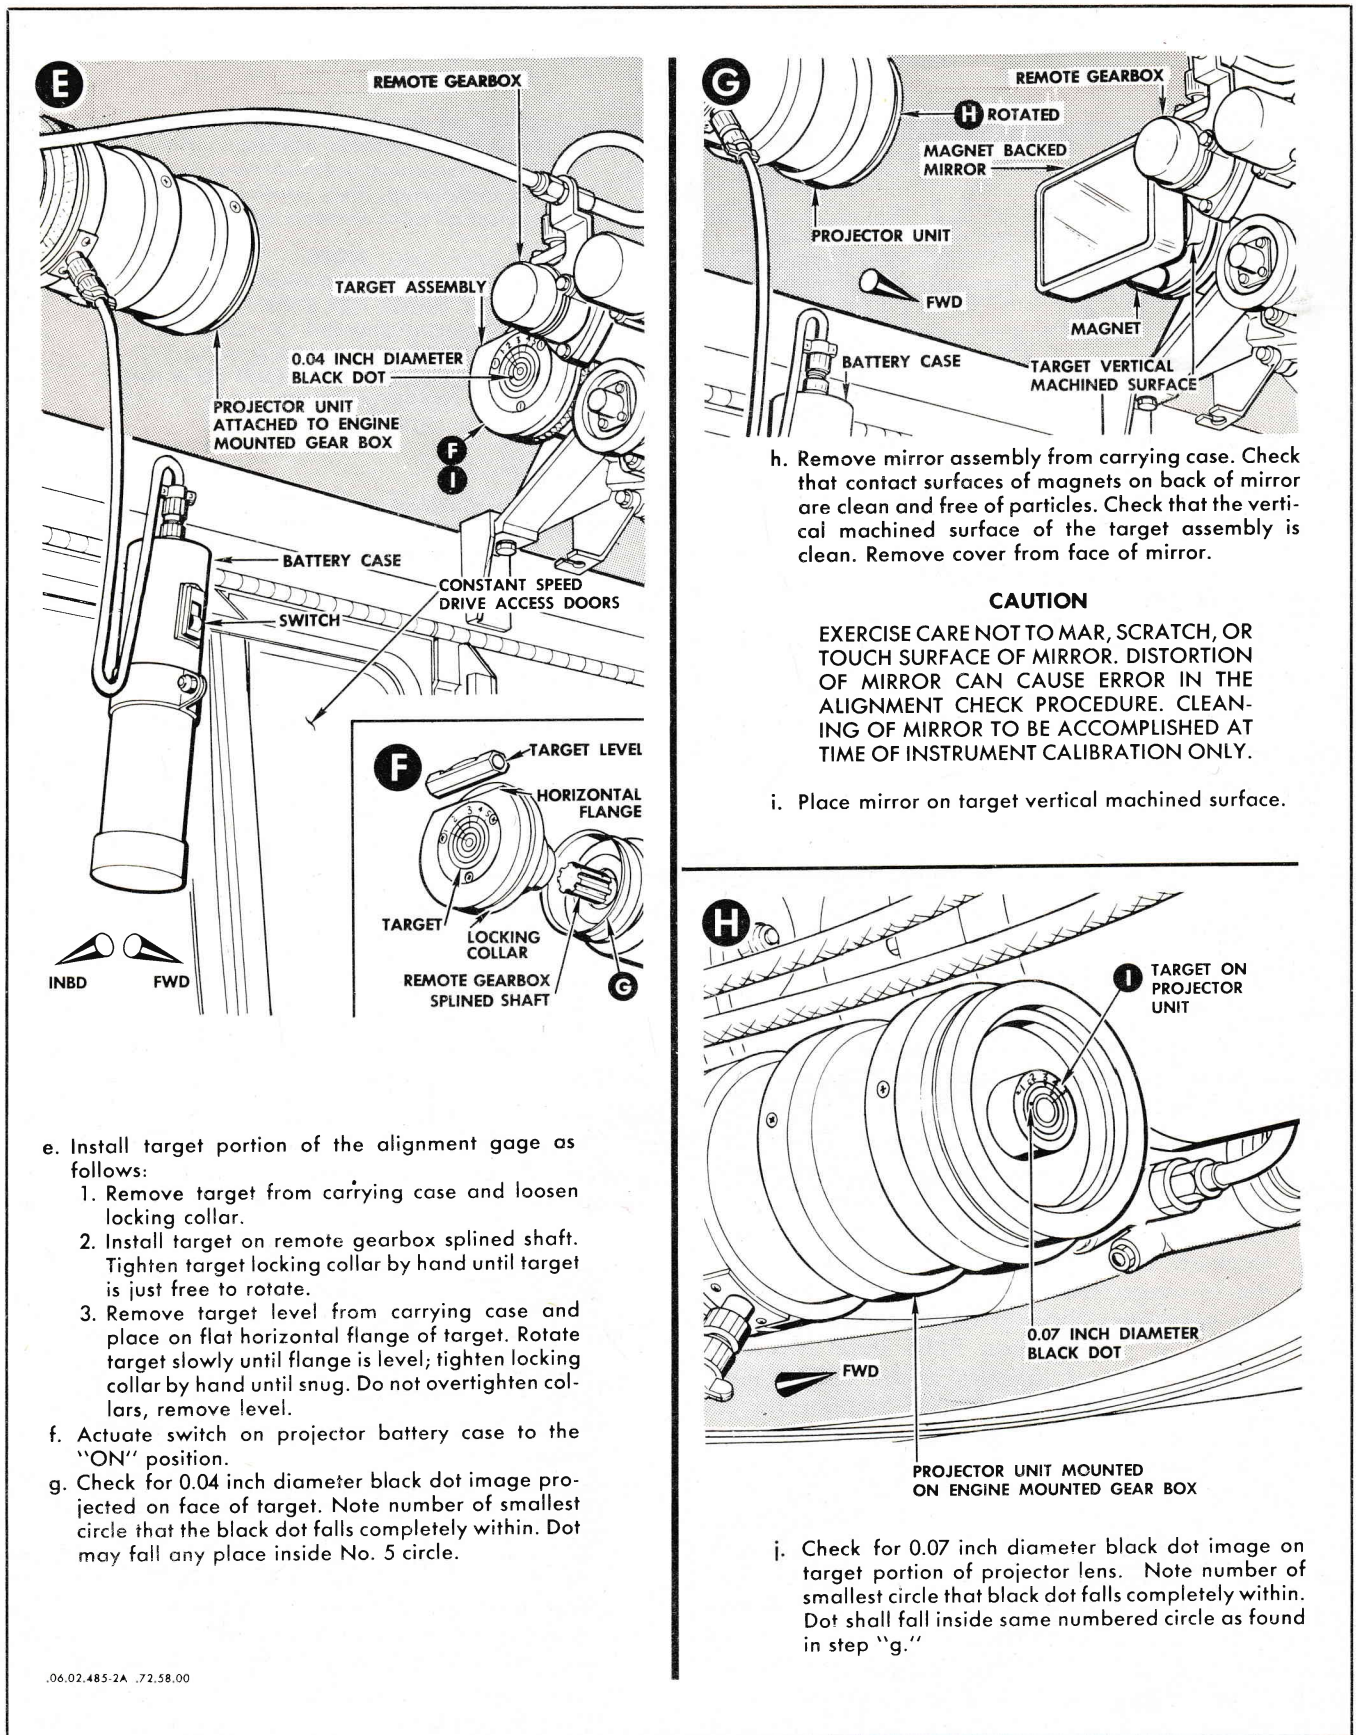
Alignment Check, Constant-Speed Remote Gearbox (Sheet 2 of 3)
